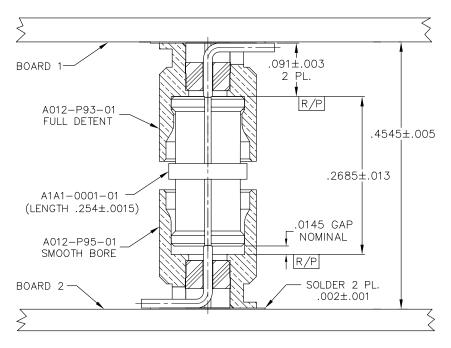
GPO Board-to-Board Tolerance Analysis
